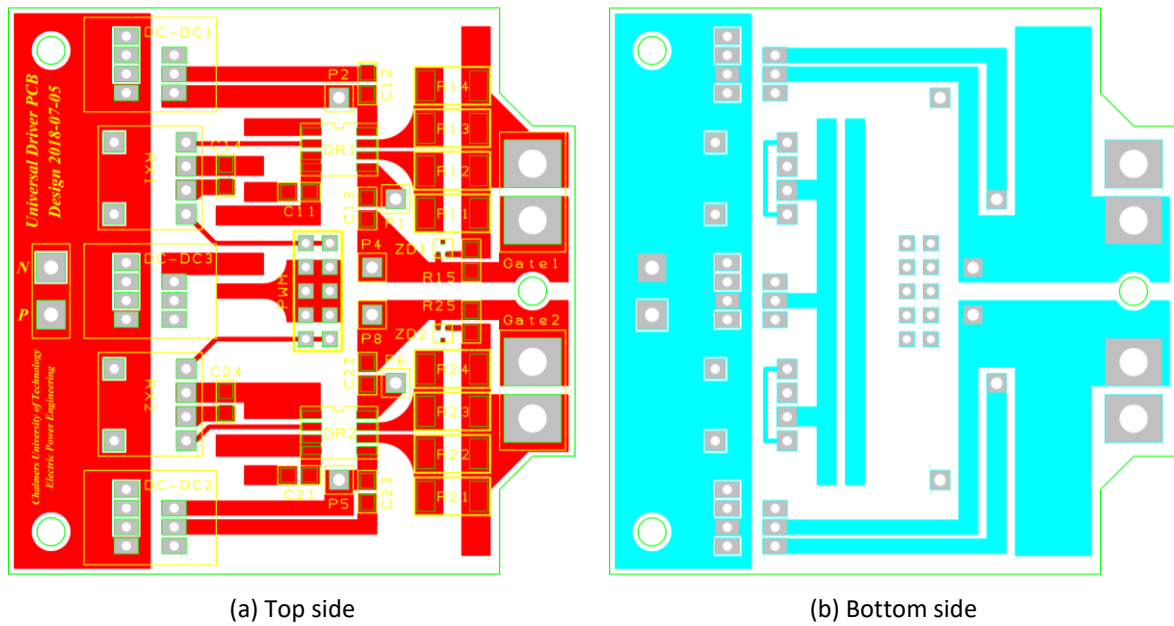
Gate Driver PCB for Three-Phase Inverter.
